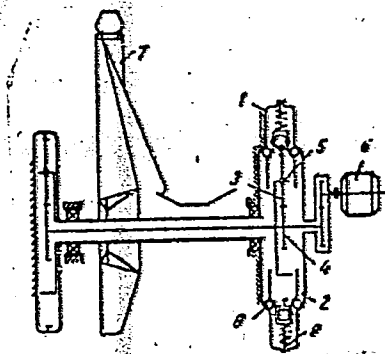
1- immobile casing of the clutch; 2- tothing;
